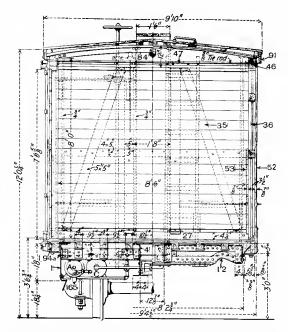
Cross Sections of Pennsylvania Railroad Steel Underframe Box Car Shown in Fig. 285.
